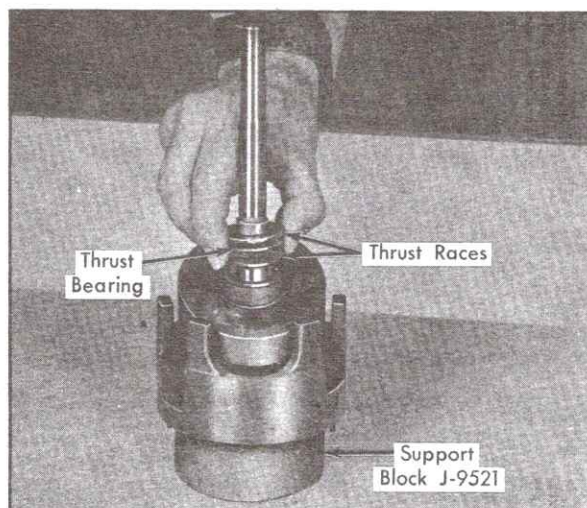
Removing Front Thrust Races &amp; Thrust Bearing
